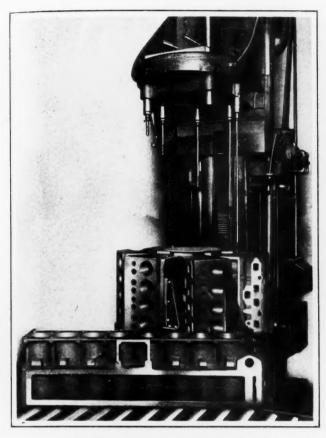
Using Five Drills up to Thirty Inches Long for Drilling Eight Holes in Line
